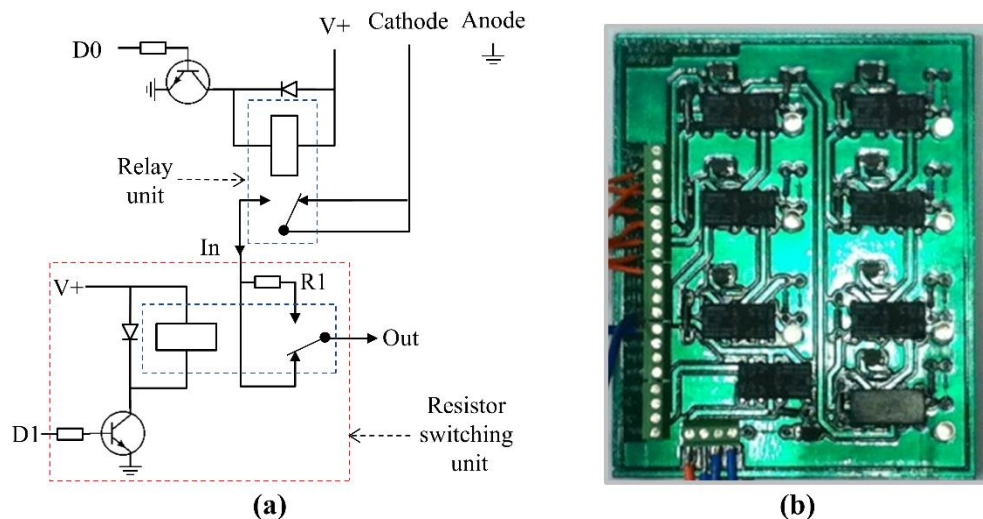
(a) Switching unit schematic for external load control electronics, and (b) printed board containing soldered components.
